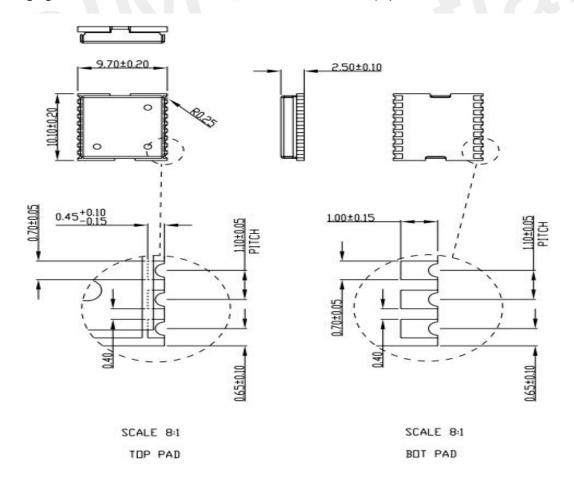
SIM68ML mechanical dimensions (Unit: mm)
